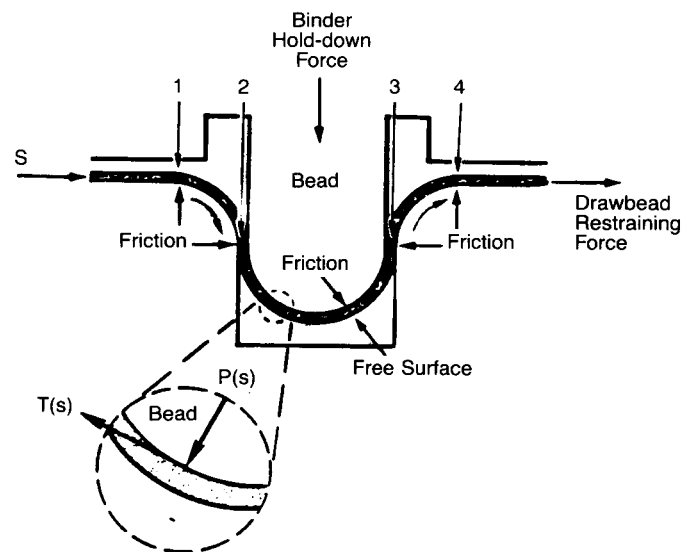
Schematic drawing of drawbead showing development of relevant forces.
